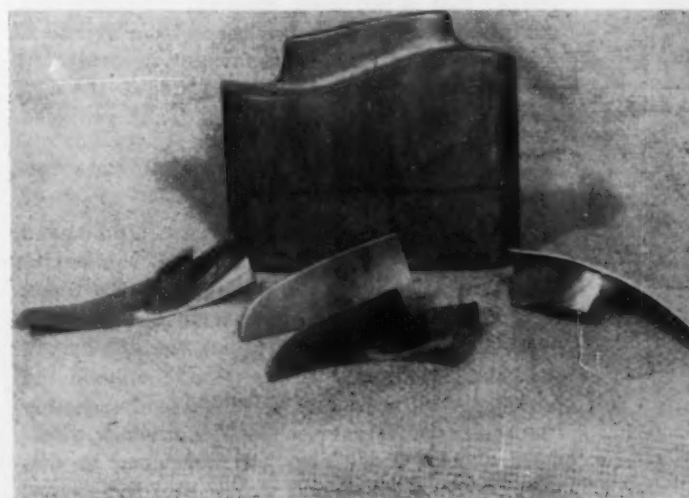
Intricate shapes made with Kirksite punches. Parts at left and right are made together by punch in background, sawed and trimmed, then welded together to form the completed part shown in the center.
